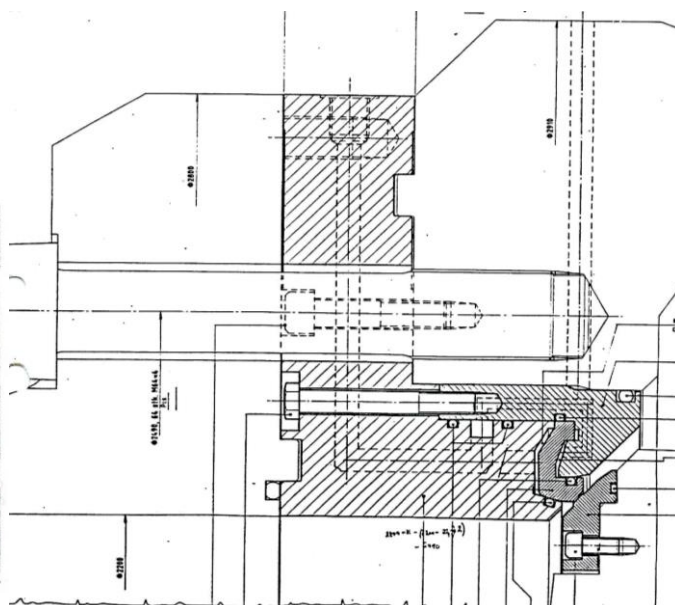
A flexible steel seal will compensate for possible eccentricity of the valve rotor in open position. (Mesitas Power Plant in Colombia)
